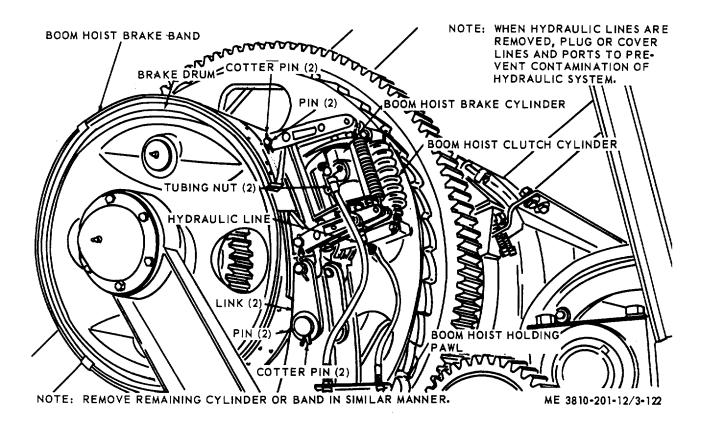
Boom planetary of hoist brake band, removal and installation.
